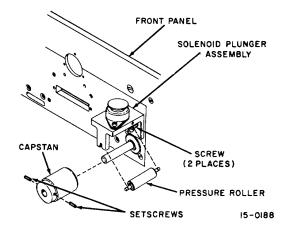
Removal of Capstan and Pressure Roller Assemblies
